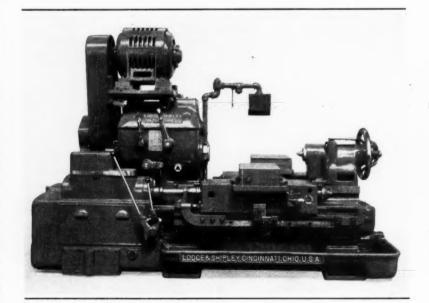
Duomatic with a Hydraulic Tool Control which Adapts it for Handling Heavy-duty Work
